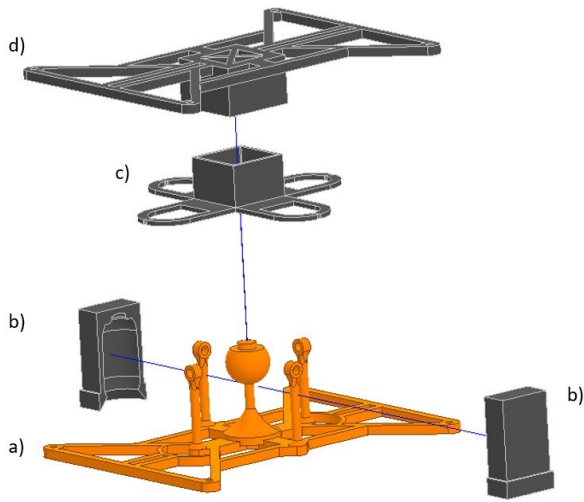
Ball joint parts presentation: a). The bottom frame fixed to the landing gear; b). 2 halves of the ball joints socket; c). Cover of the socket for assembly and anchor points for limiting the yaw movement of the bottom frame; d). Top mount frame fixed to the UAV bottom.
